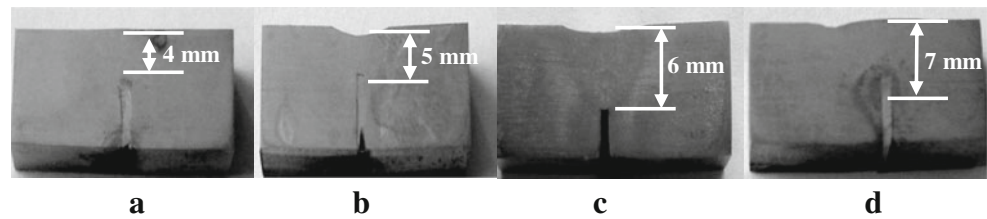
The cross-sectional macro photographs of welded samples
